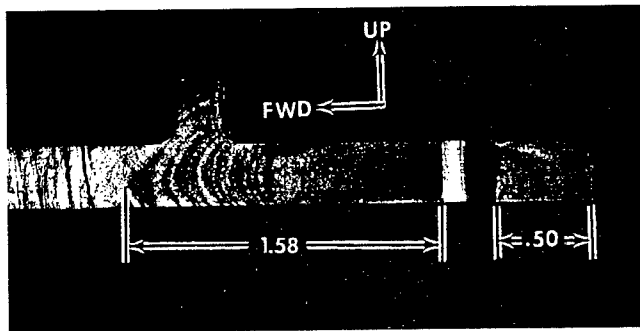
CZ-180, Stiffener S8, Hole 37, Base Flange Crack
